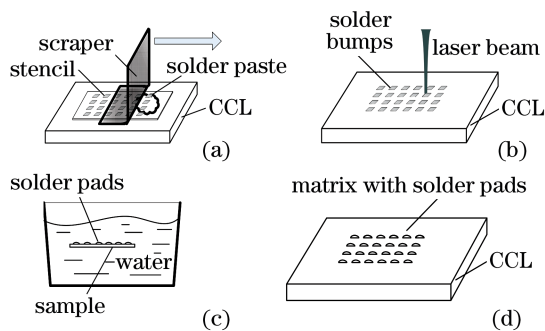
Technological process of laser soldering. (a) Solder paste layer printing; (b) laser scanning; (c) cleaning; (d) soldering finished.
